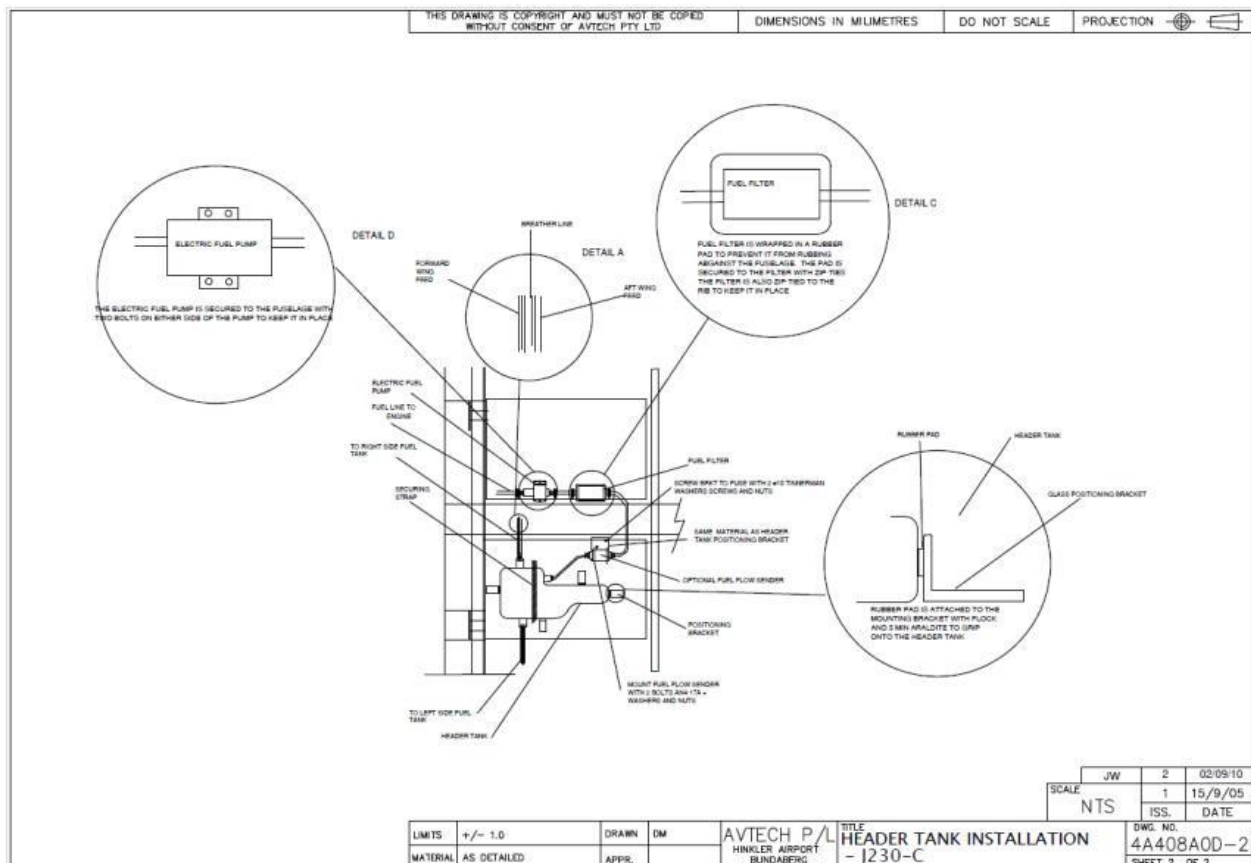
Header Tank Installation – Type 2 (Sheet 2) (all J-Series, n/a J120)
